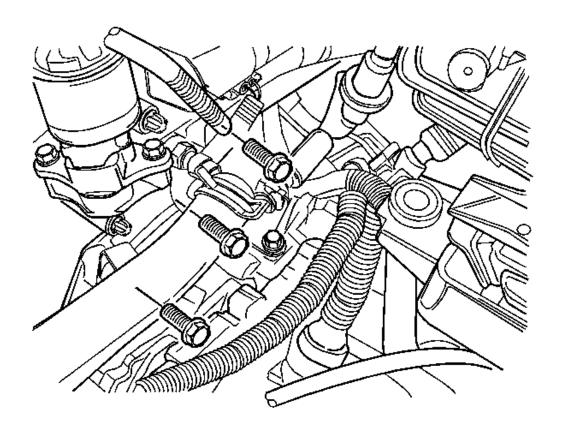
View Of Left Flywheel Inspection Cover Courtesy of GENERAL MOTORS CORP.
